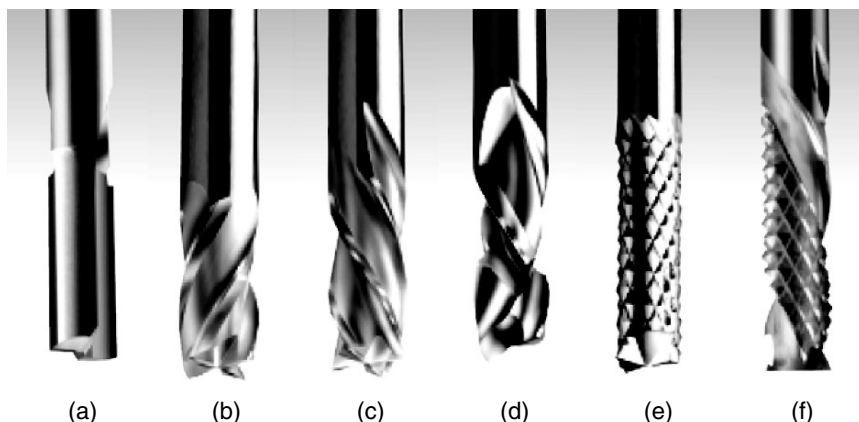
Geometry of cutting tools for milling composite materials (a) straight flute, (b) upcut helical tool, (c) downcut helical tool, (d) double spiral compression tool, (e) burr tool, (f) fluted bur (courtesy of ONSRUD tool company)
